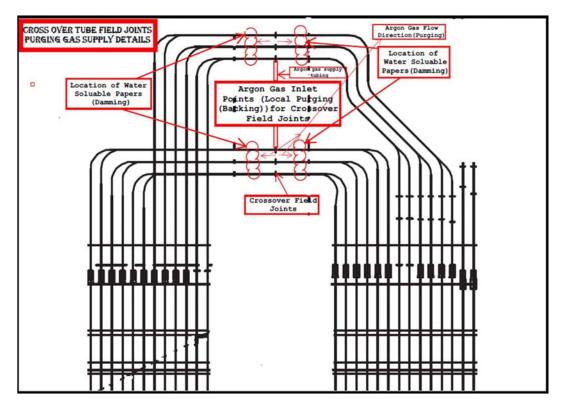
Purging Arrangement for Cross Over Tube Field Joints
